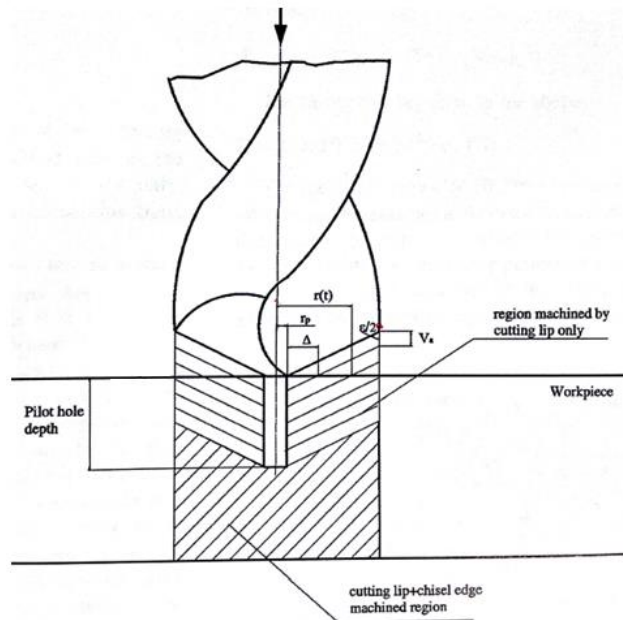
Workpiece section with pilot hole and region machined differently [72]
